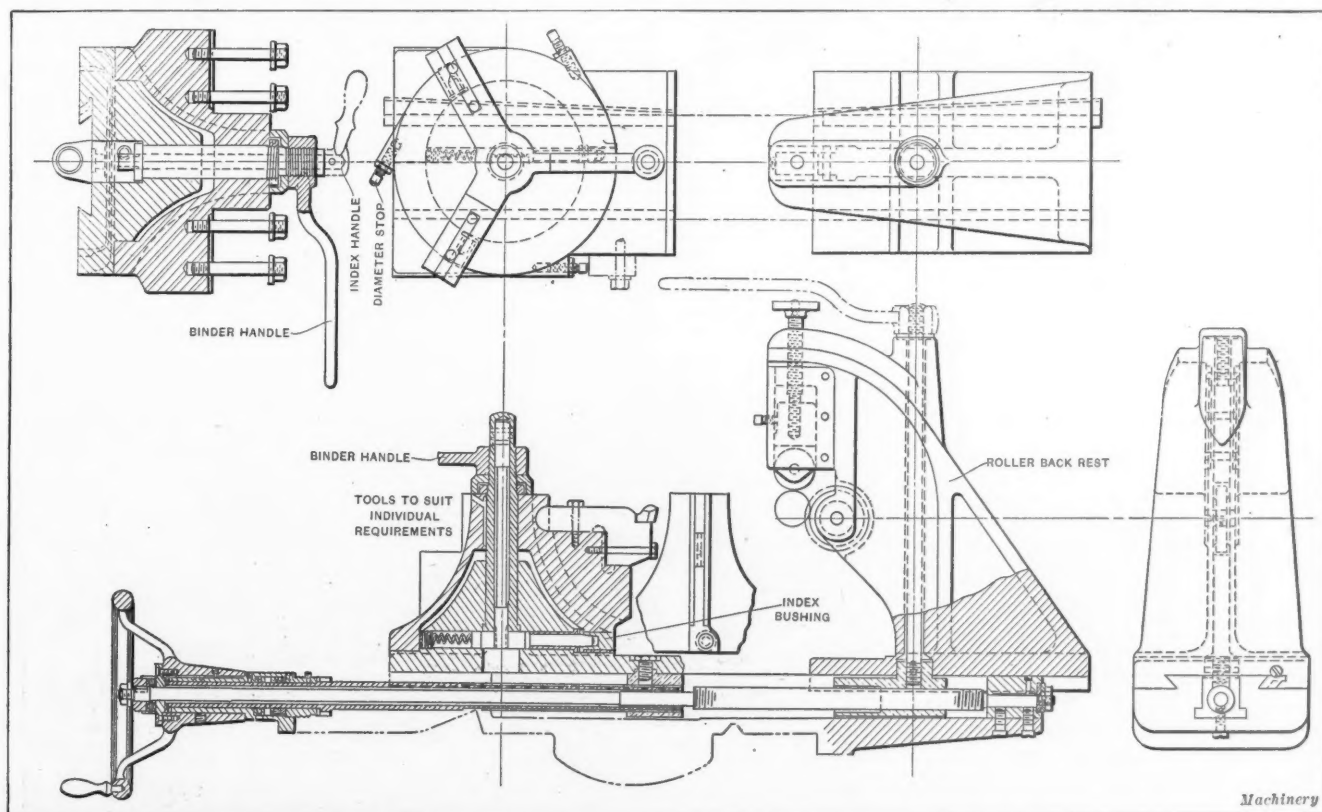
Design of Three-tool Turret and Roller Back-rest for Type A Machine
